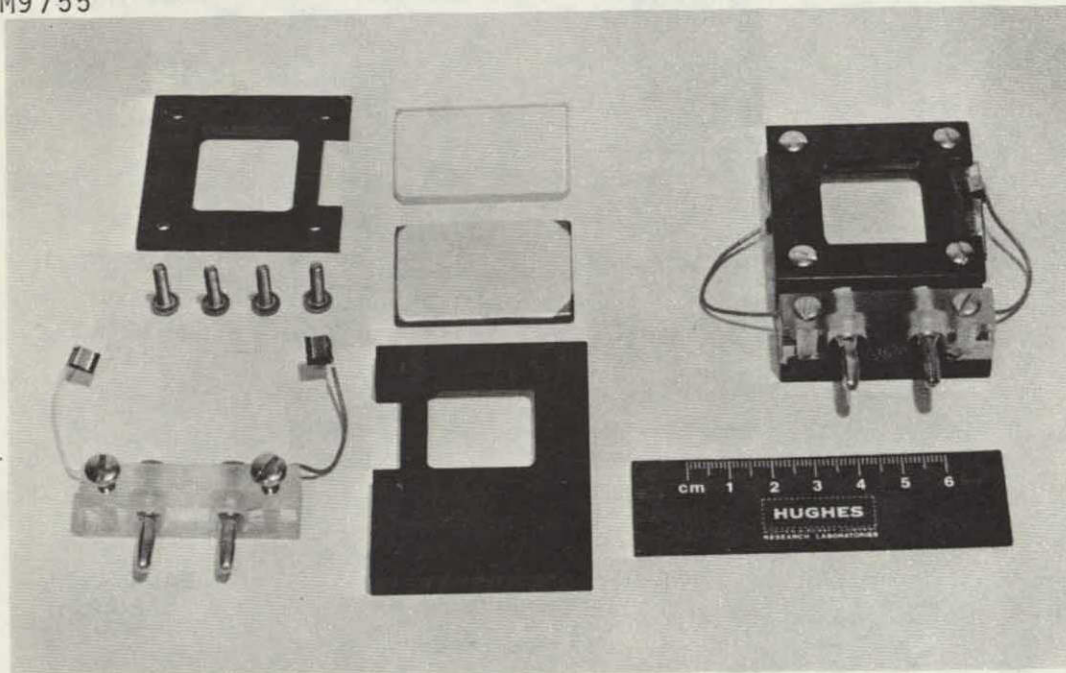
Exploded view of photoactivated liquid crystal light valve device.
